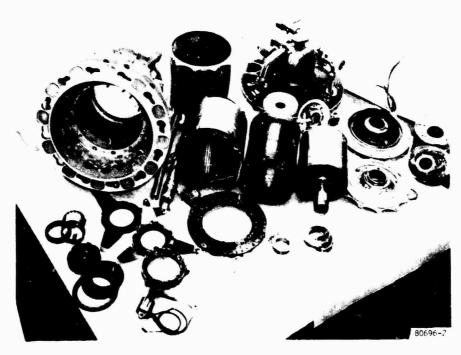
Generator Detail Parts After Quick-Disconnect Failure (View B)
